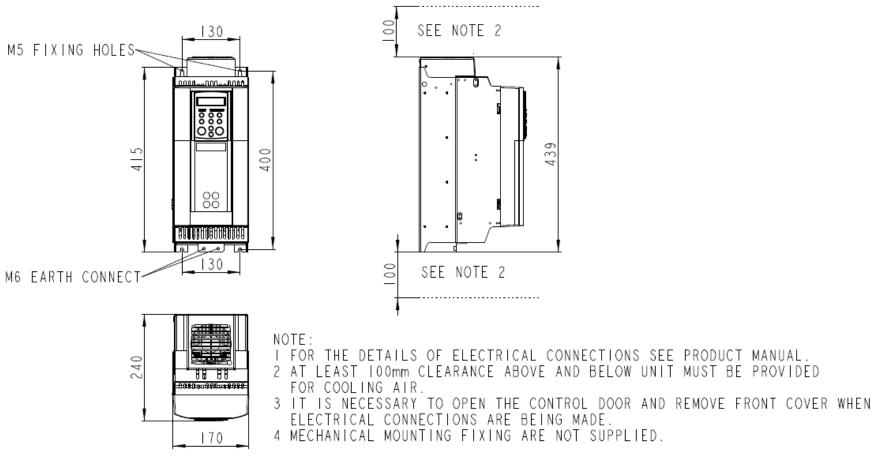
Frame 2 : 110A/165A Stack Assembly
